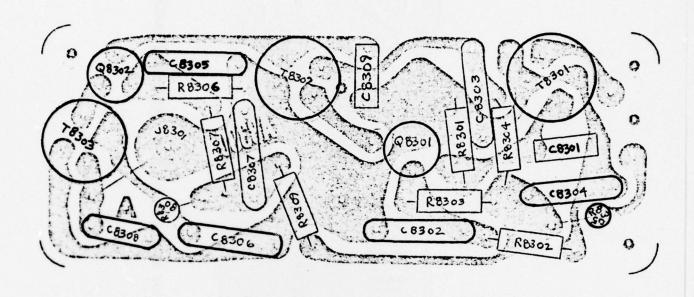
P.C. BOARD LAYOUT FOR THE A8300A TRANSMITTER FIRST AND SECOND IF AMPLIFIER ASSEMBLY
